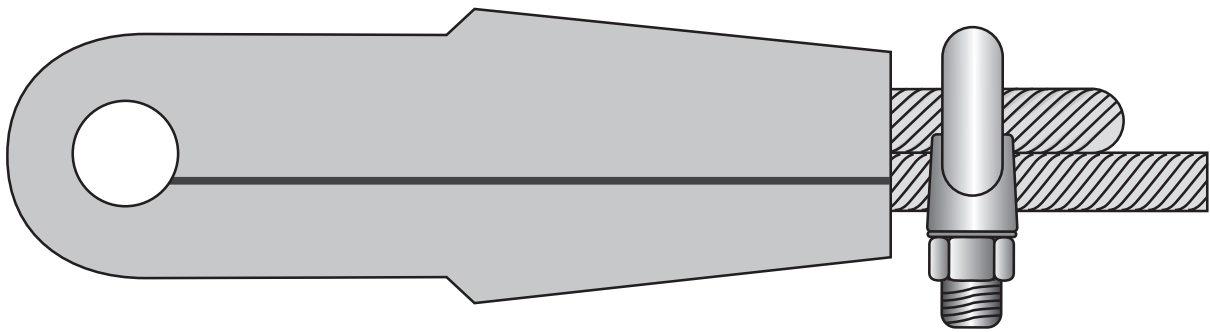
Symmetrical wedge socket in accordance with EN 13411-7
